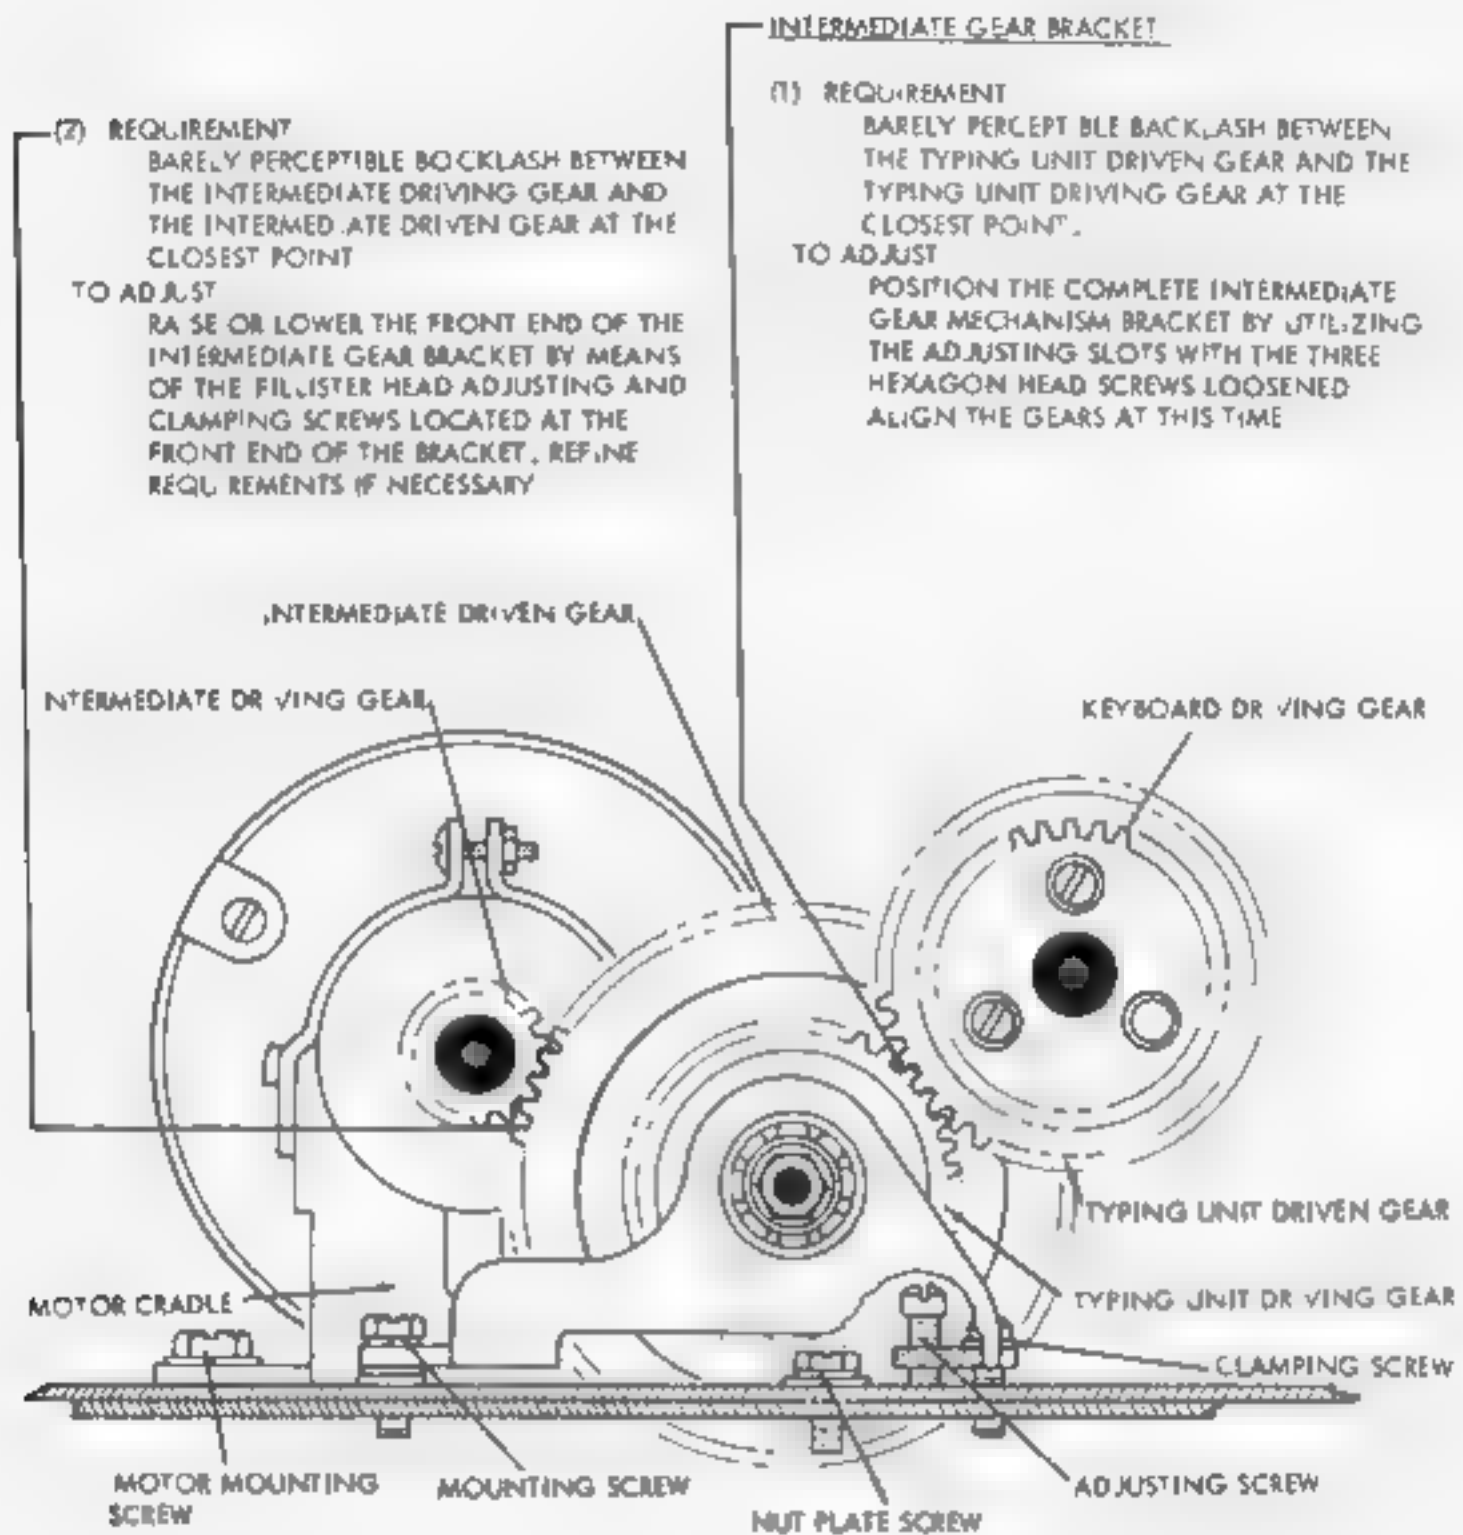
TYPING UNIT AND MOTOR PINION INTERMEDIATE GEAR ASSEMBLY
